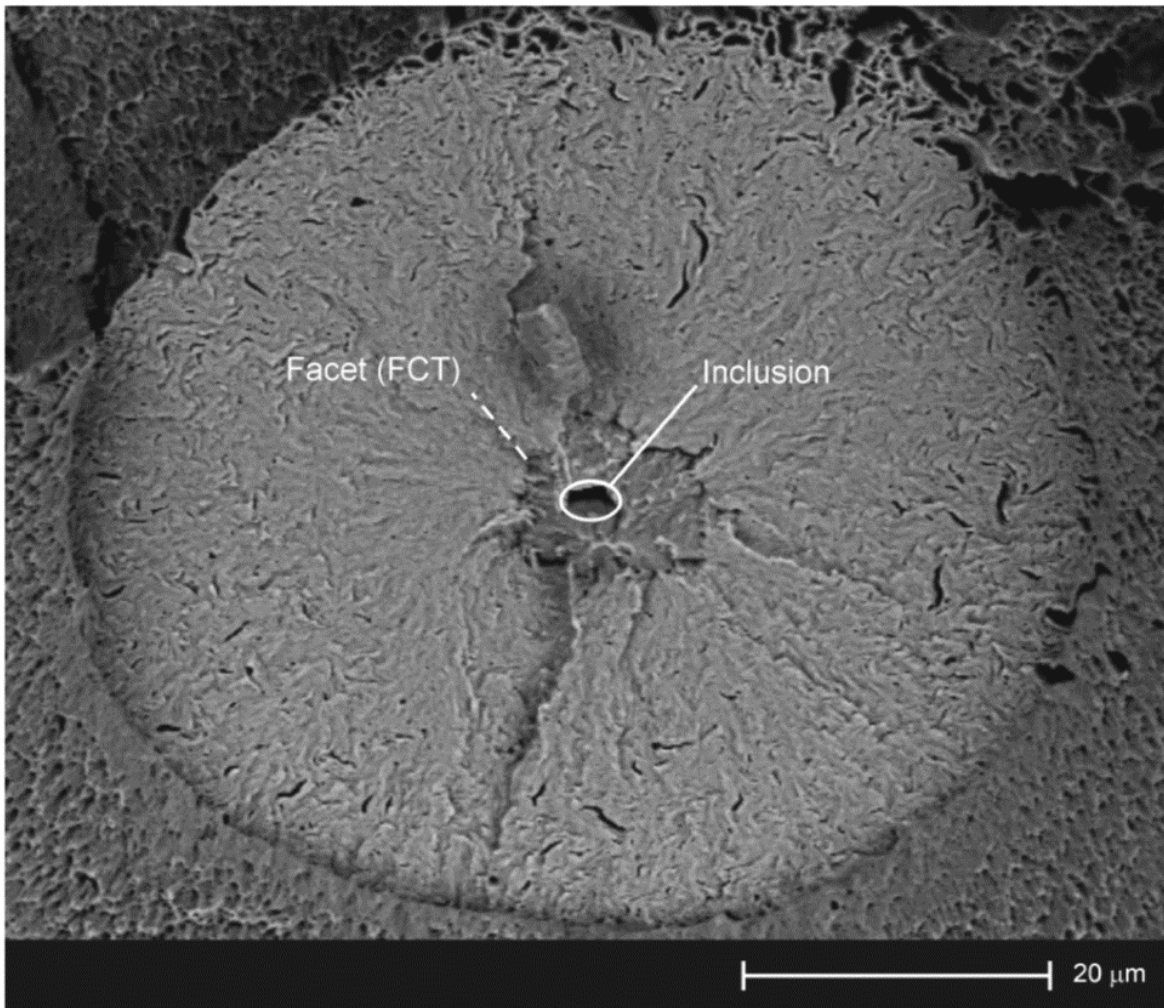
Closer Image of Internally Initiated Fatigue Crack, showing Facet Area [ref. 9]
